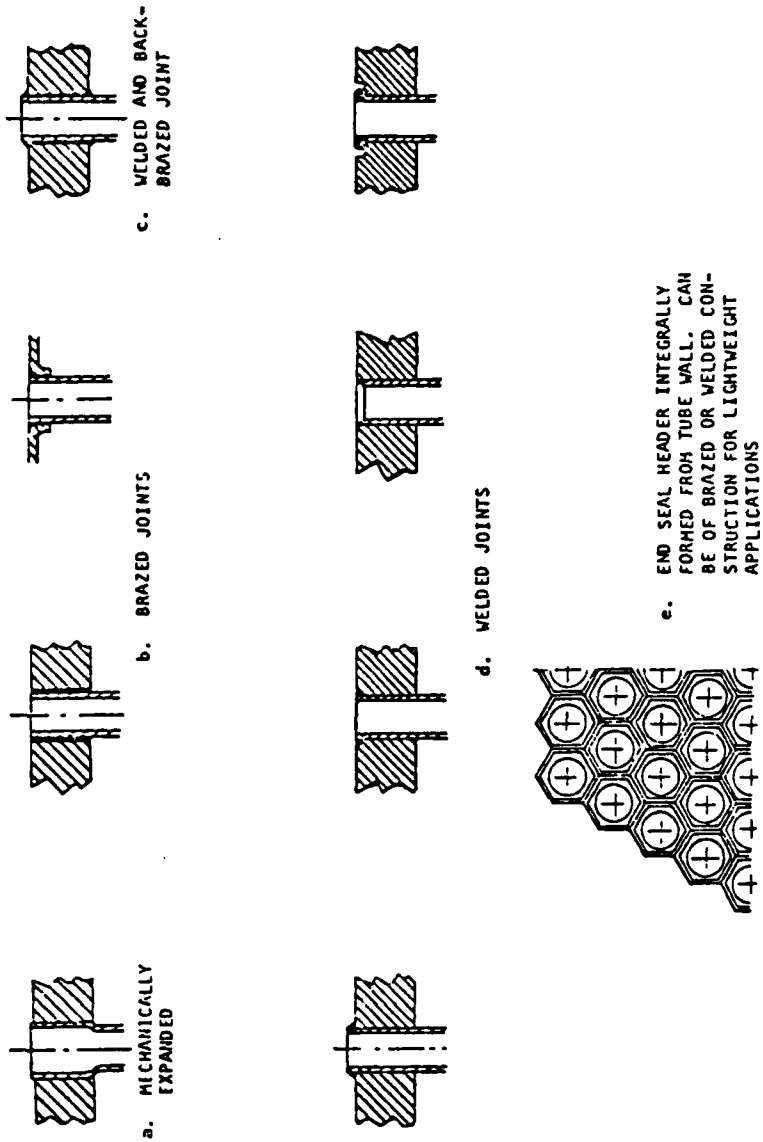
Typical Types of Tube to Header Joints (Reference 2)
